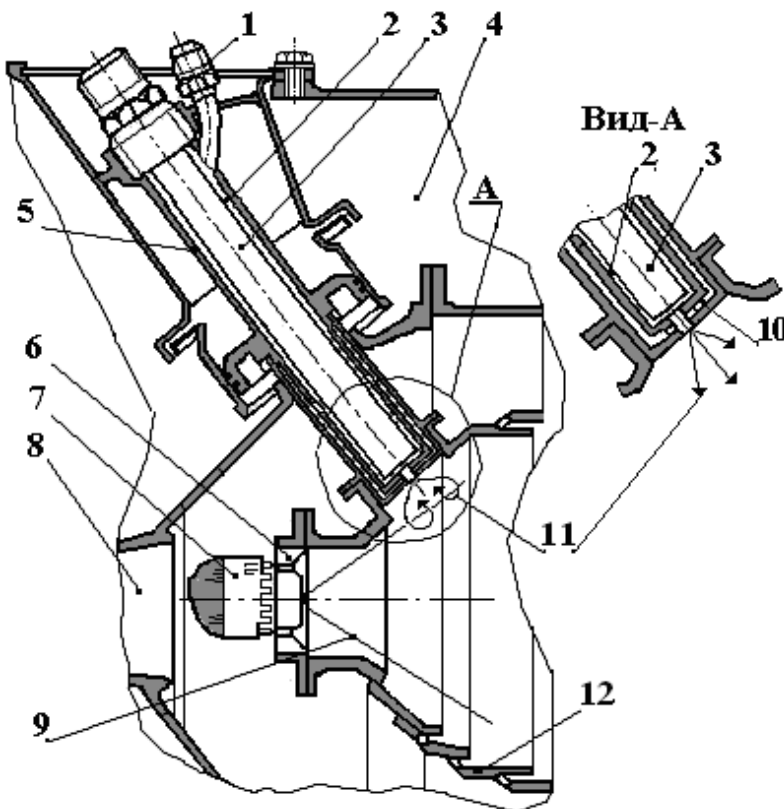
Combustion chamber direct ignition system: 1 – oxygen replenishment union; 2 – backlash for supplying oxygen to a plug; 3 – surface discharge plug; 4 – zone of the TFE secondary flow; 5 – sleeve; 6 – swirl vanes; 7 – fuel nozzle; 8 – diffuser; 9 – fuel spray cone; 10 – backlash for plug ventilation by a fresh air; 11 – zone of oxygen supply and electric arc propagation; 12 – flame tube
